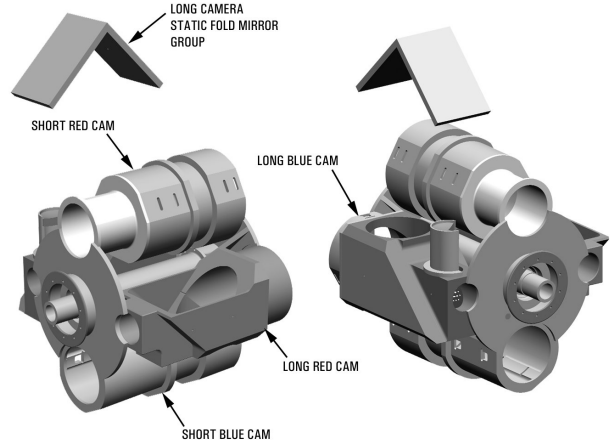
The GNIRS 4-camera turret assembly is shown.
